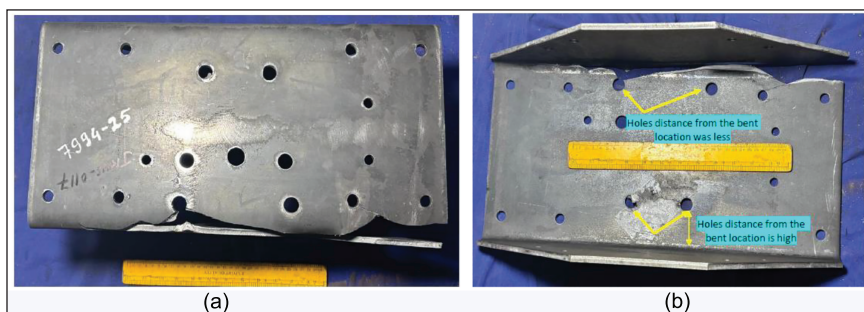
Failure Sample Indicating Cracks During Forming (a) Front View (b) Rear View.
